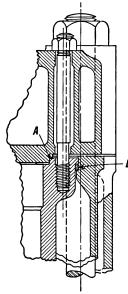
Wet Sleeve with Auxiliary Head Studs.
